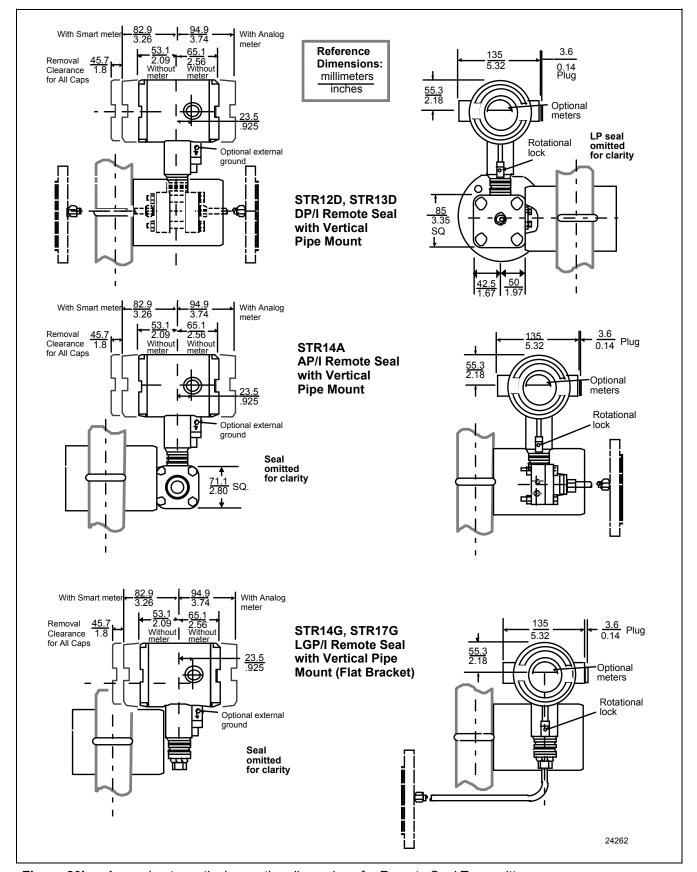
Approximate vertical mounting dimensions for Remote Seal Transmitter.
